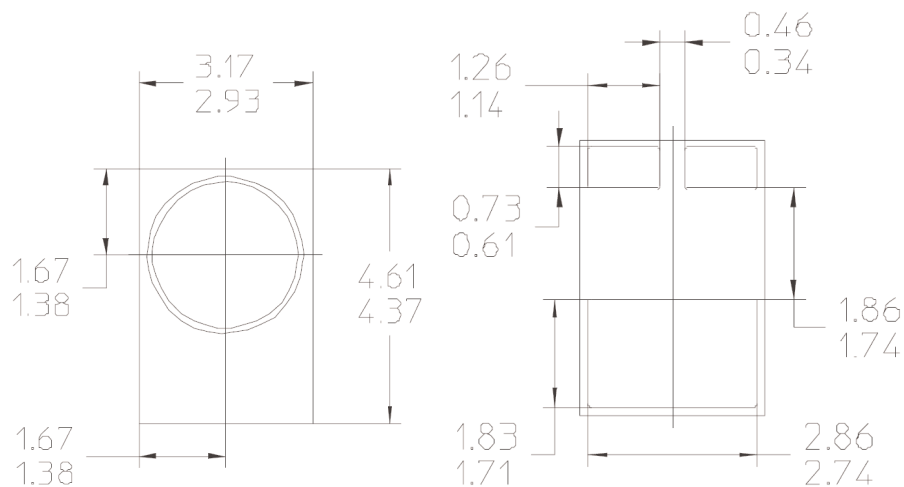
Mechanical dimensions of LUXEON Rebel package.
